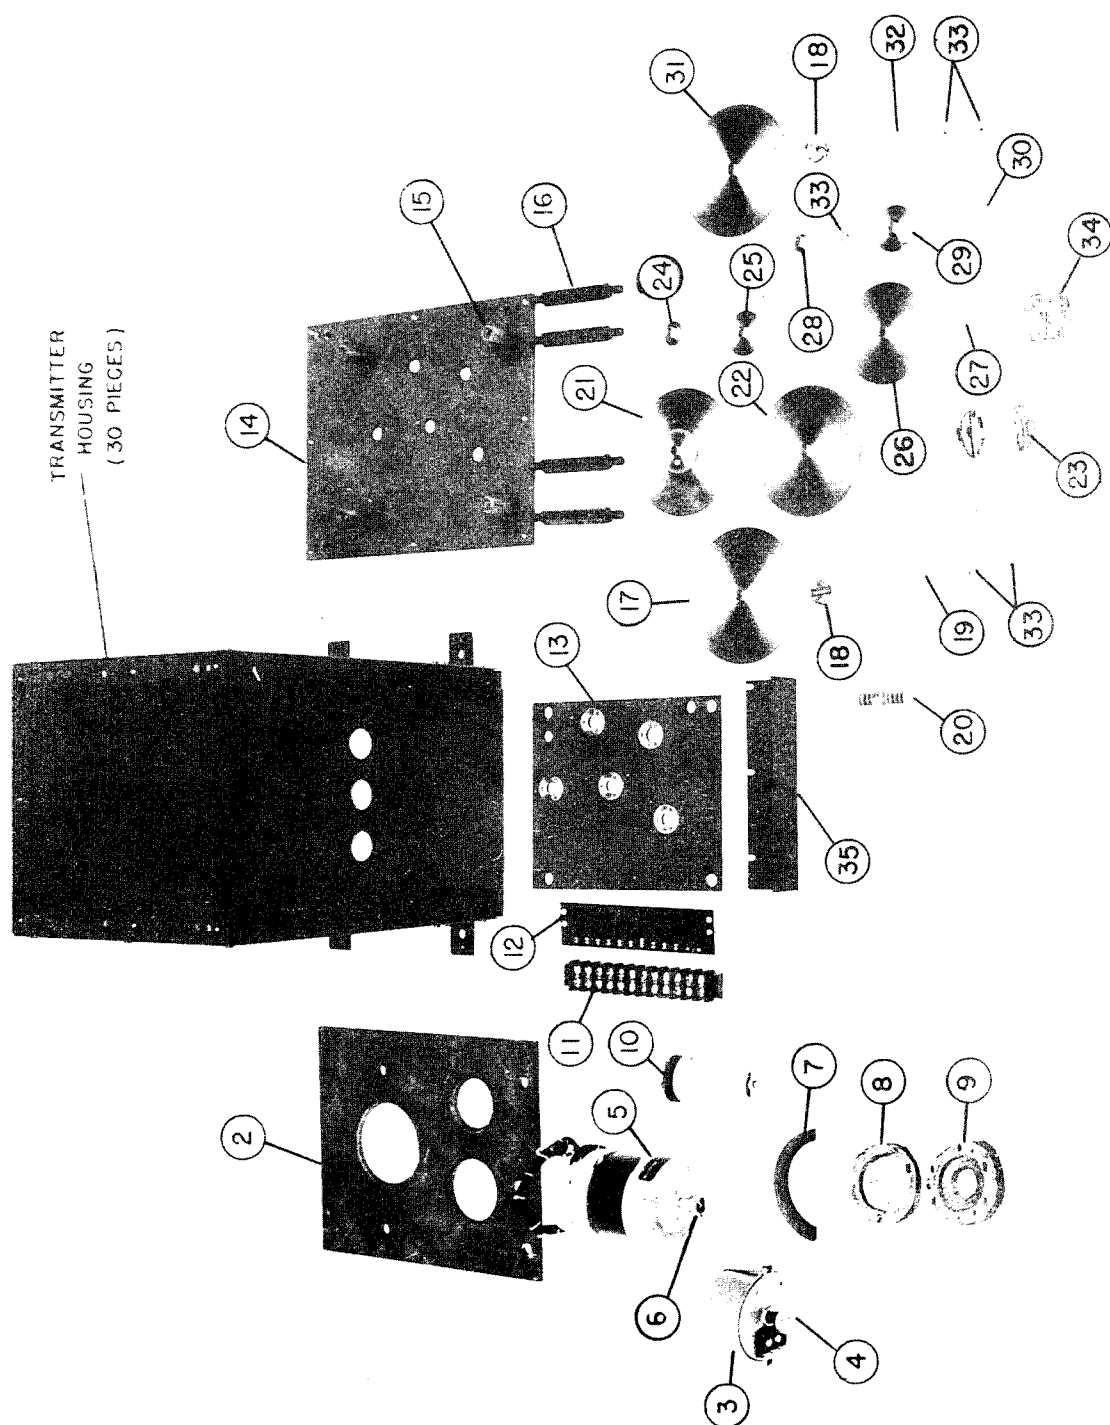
EMERGENCY-ROD POSITION TRANSMITTER DISASSEMBLED
